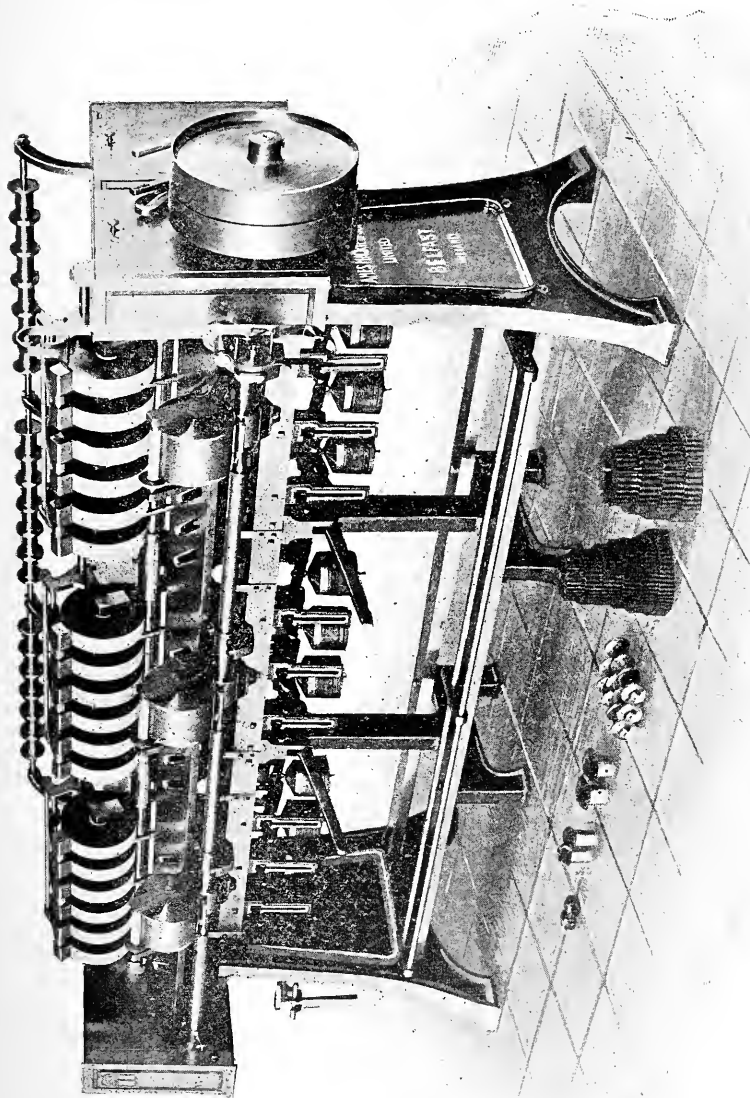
Spiral drawing frame for flax or hemp tow (front view).
